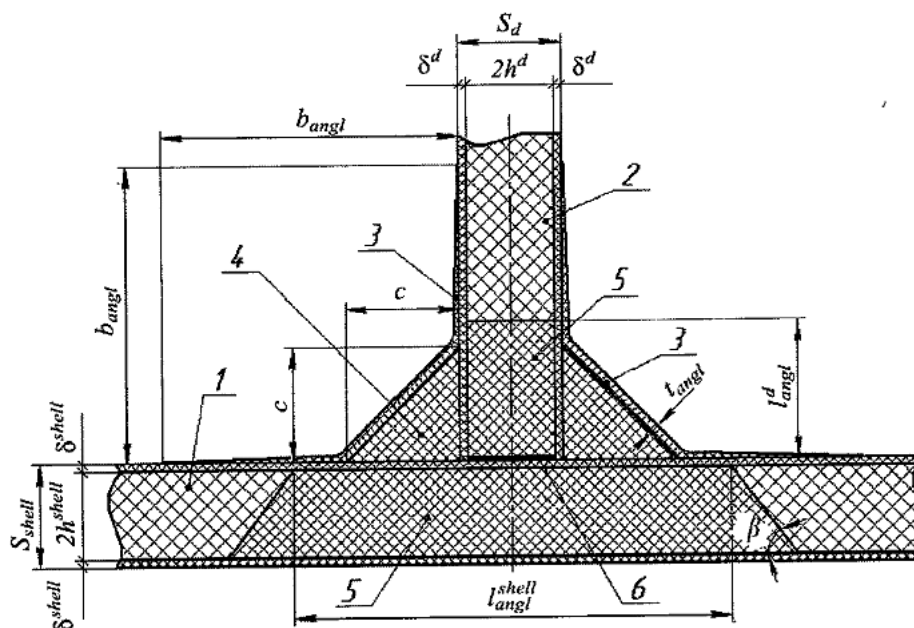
Joint of the hull shell and sandwich bulkhead:
